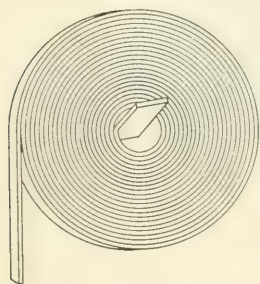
CHOKE COIL, FLAT SPIRAL FORM
